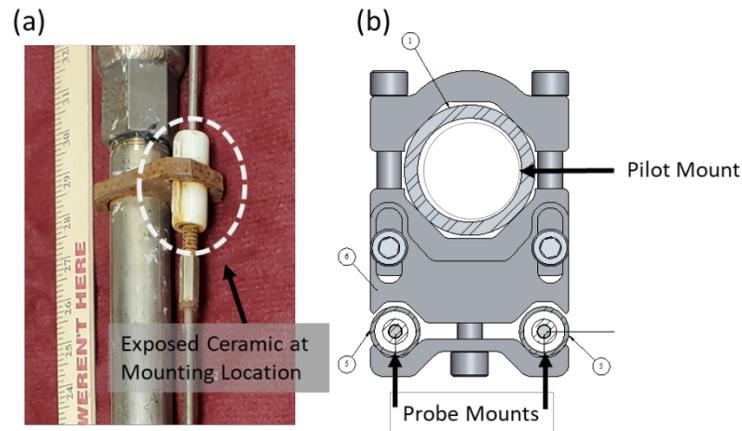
Mounting configuration for (a) flame rods and (b) ClearSign EYE
